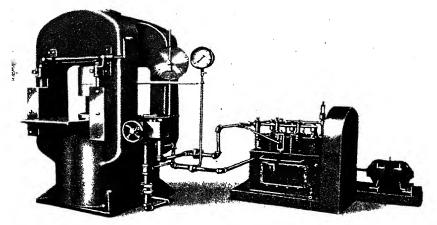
Hobbing unit with six-plunger pump, depth gage, elevating table, and hardened steel anvils.
